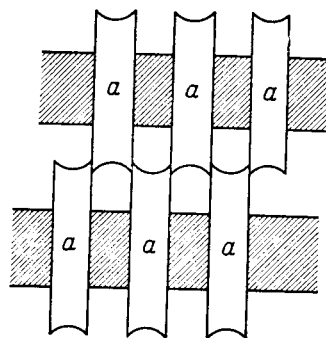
A design for rollers cutting lengthwise, according to Vennin *et al.* [13]; a—cutting knives.
